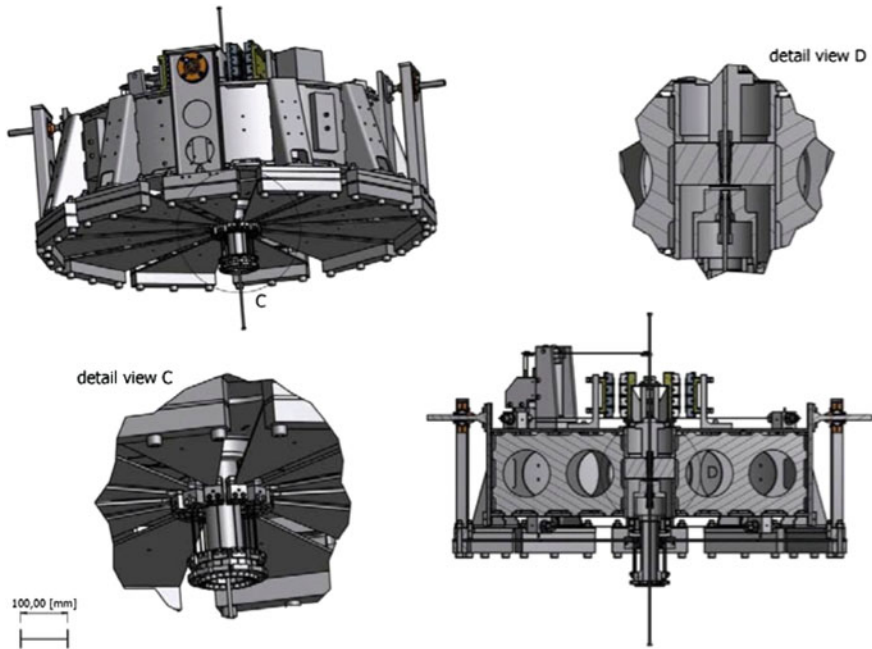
Technical drawings of the mechanical filters for the VIRGO superattenuator. A complete mechanical filter is visible (*upper left*) where 12 cantilever triangular blades are clamped on the outer circumference of the filter body *bottom part*. A detail of the blade tip connection through a thin steel piano wire to the mobile central column, is shown in the *left bottom corner* (detail view C). The filter body cross section is shown on the *right bottom*. The *crossbar* (moving part of the mechanical filter) supporting the permanent magnets of the anti-spring system, is visible on *top* of the filter body. The fine alignment of these moving magnets with respect to those anchored to the filter body is obtained via the remotely controlled fishing rod, also shown. In the *right top corner*, a detail of the central column cross section (detail view D) shows the connection of two suspension wire sections in the mechanical filter center of mass
